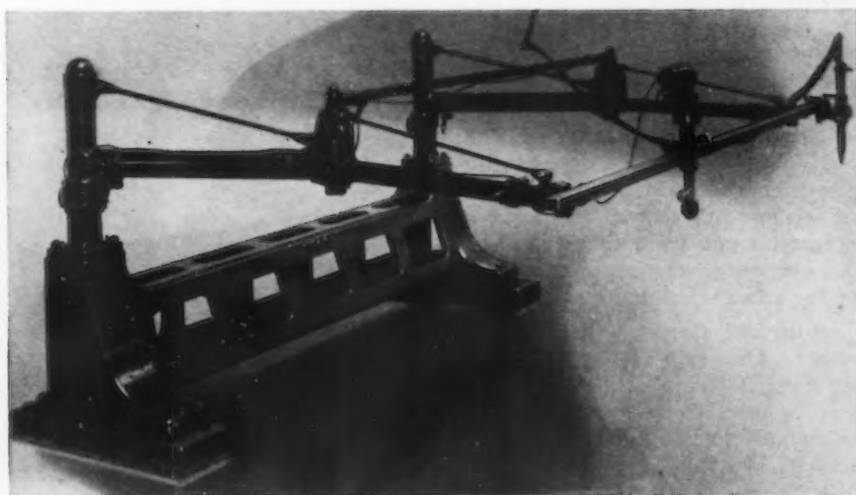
An Airco-DB No. 6 Oxygraph with auxiliary equipment shown in close-up in the other figures is employed for cutting large "inside" or barrel cams for Bliss No. 315 automatic beaders.
